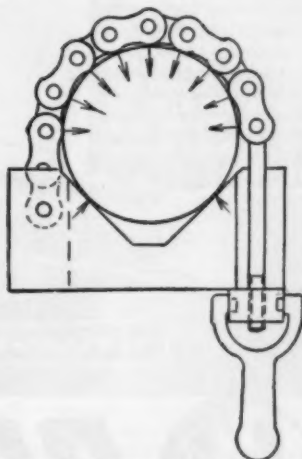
Clamping of a cylindrical work piece by means of a roller chain.
